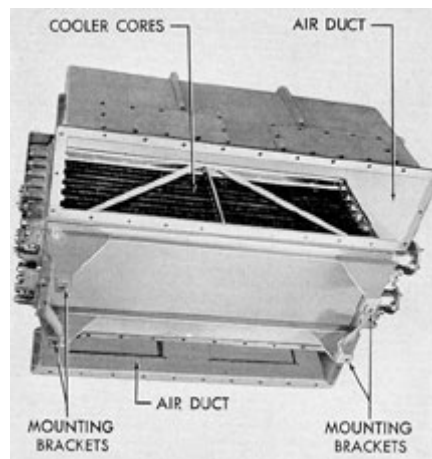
Bottom view of G.E. main generator cooling unit.
